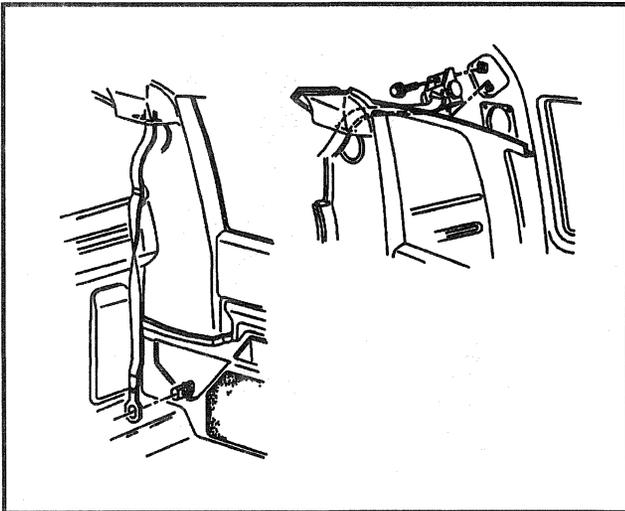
Rear Seat Belt Attachment (Crew Cab with Folding Rear Seat)
